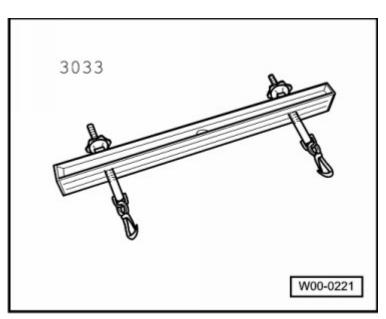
Identifying Lifting Tackle 3033 Courtesy of AUDI OF AMERICA, LLC
